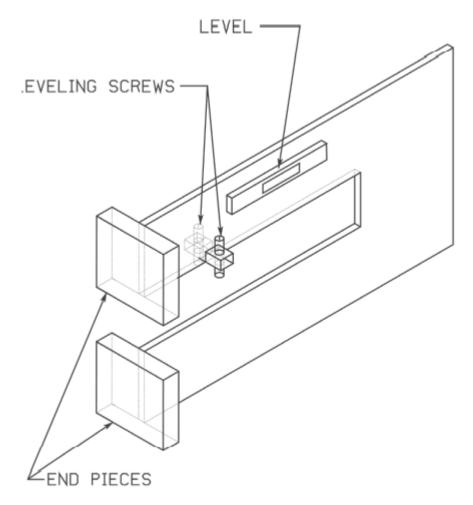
Sketch of the fixture for lateral alignment of thin 15 in. diameter HEU metal plates.
